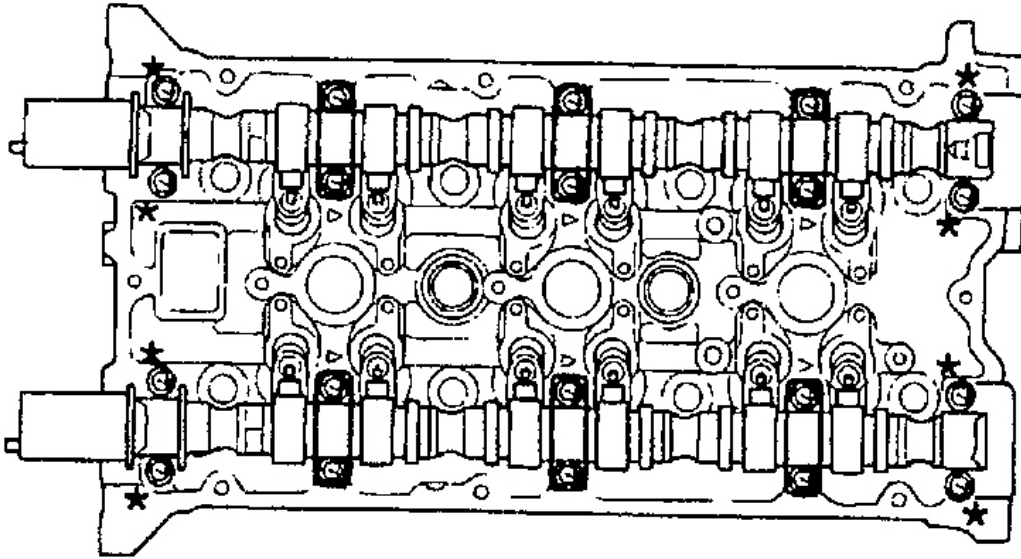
Confirming Bearing Cap Identification Mark & Number
